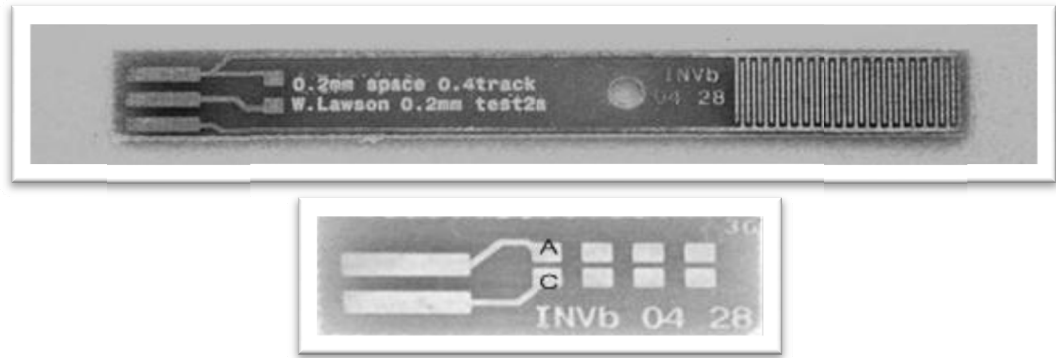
Top, Single Comb Sample. Bottom, 0.4 mm spaced SMD Sample
